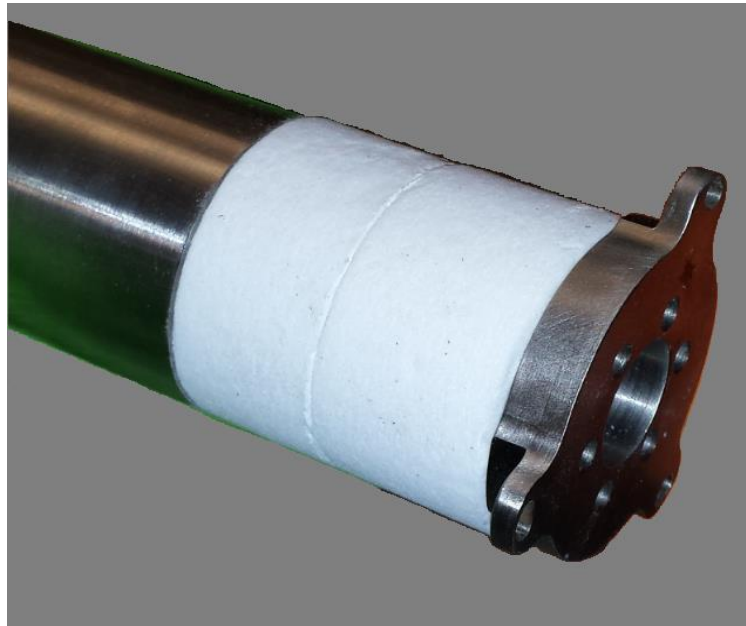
Different parts of the support system assembled together along with the inner cylinder assembly.
